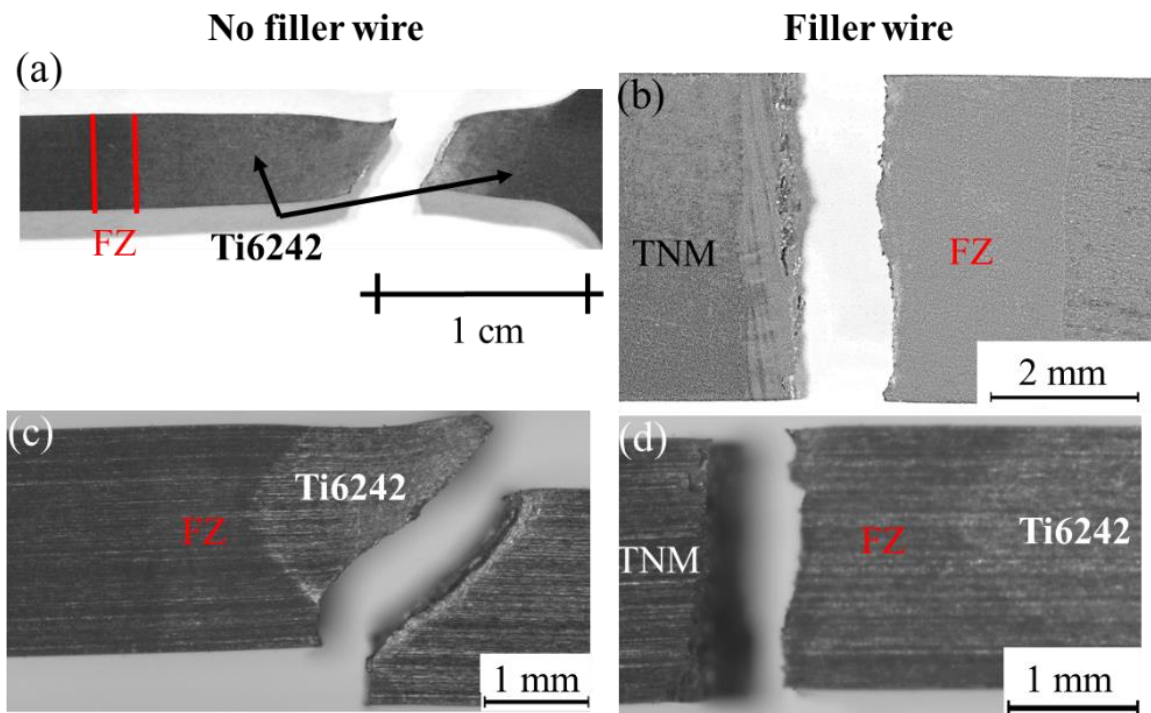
Fracture position of grinded dissimilar TNM-Ti6242 joints welded (b), (d) with and (a), (c) without filler wire tested at 425 °C. Welding parameters: $P=4.5$ kW, $v=3$ m/min, $v_w\sim 3.6$ m/min, $T_{ph}=800$ °C.
